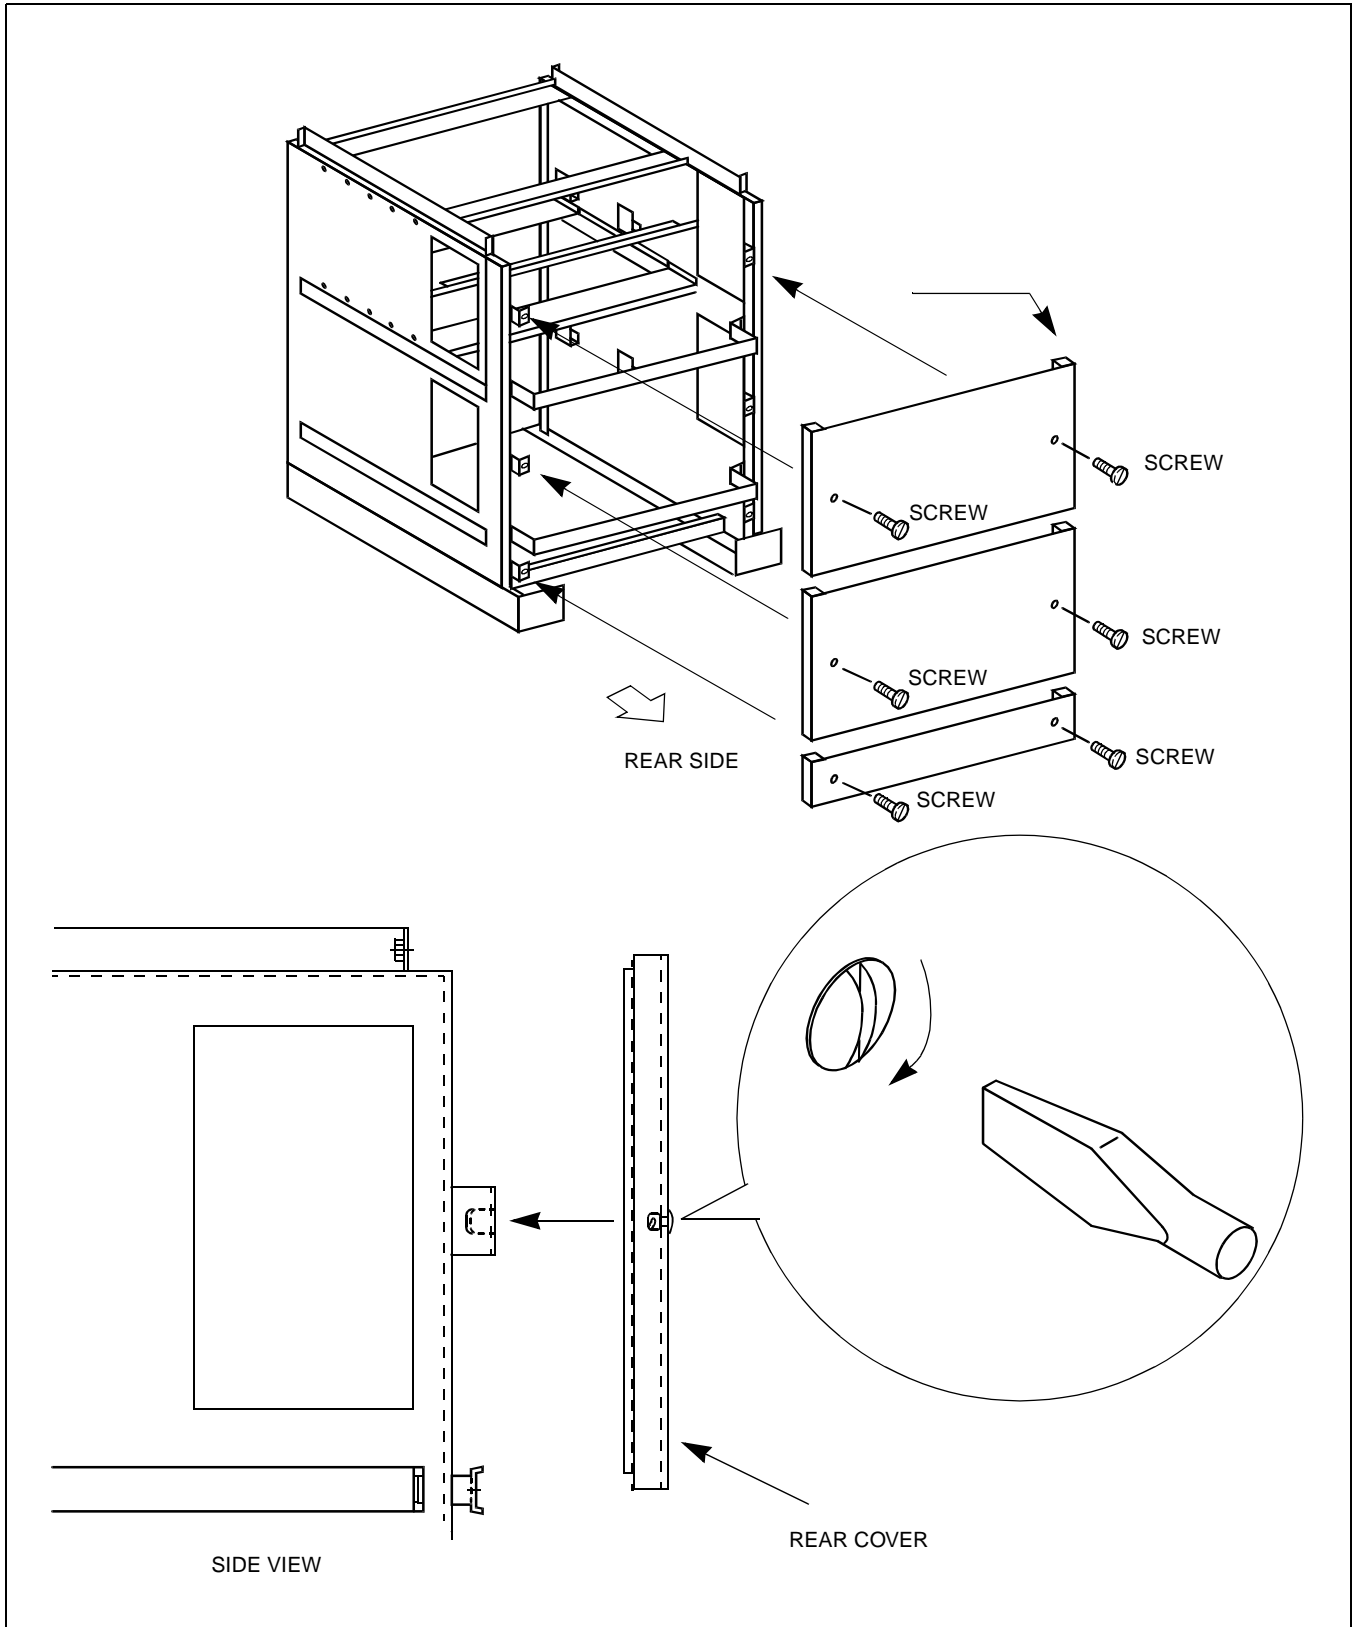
Rear Cover Mounting Method (BASEU+LPR+PIM0)
